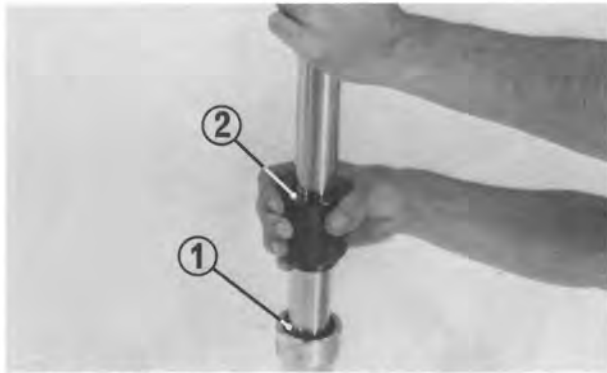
(1) Oil seal (2) Oil seal driver
